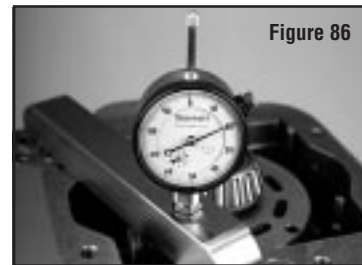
In preparation of zeroing in the swashplate, first place a parallel bars across the face of the pump housing. Make sure these bars are resting firmly on the housing face. Next using a depth micrometer, measure the distance from the parallel bar to the face of the swashplate. Make note of this dimension. (see Figure 86)
